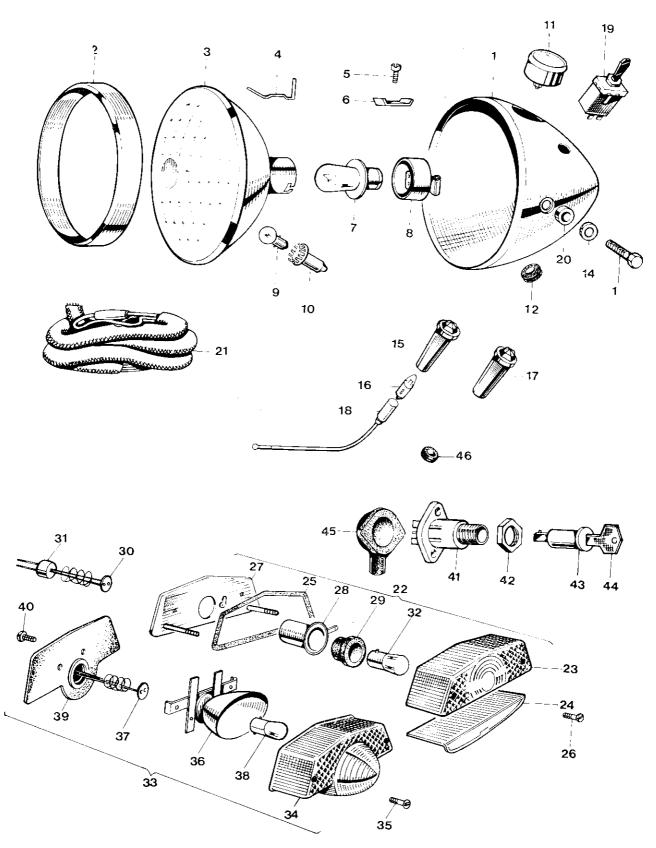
HEADLAMP, WIRING HARNESS, SWITCHES AND TAIL LAMP
